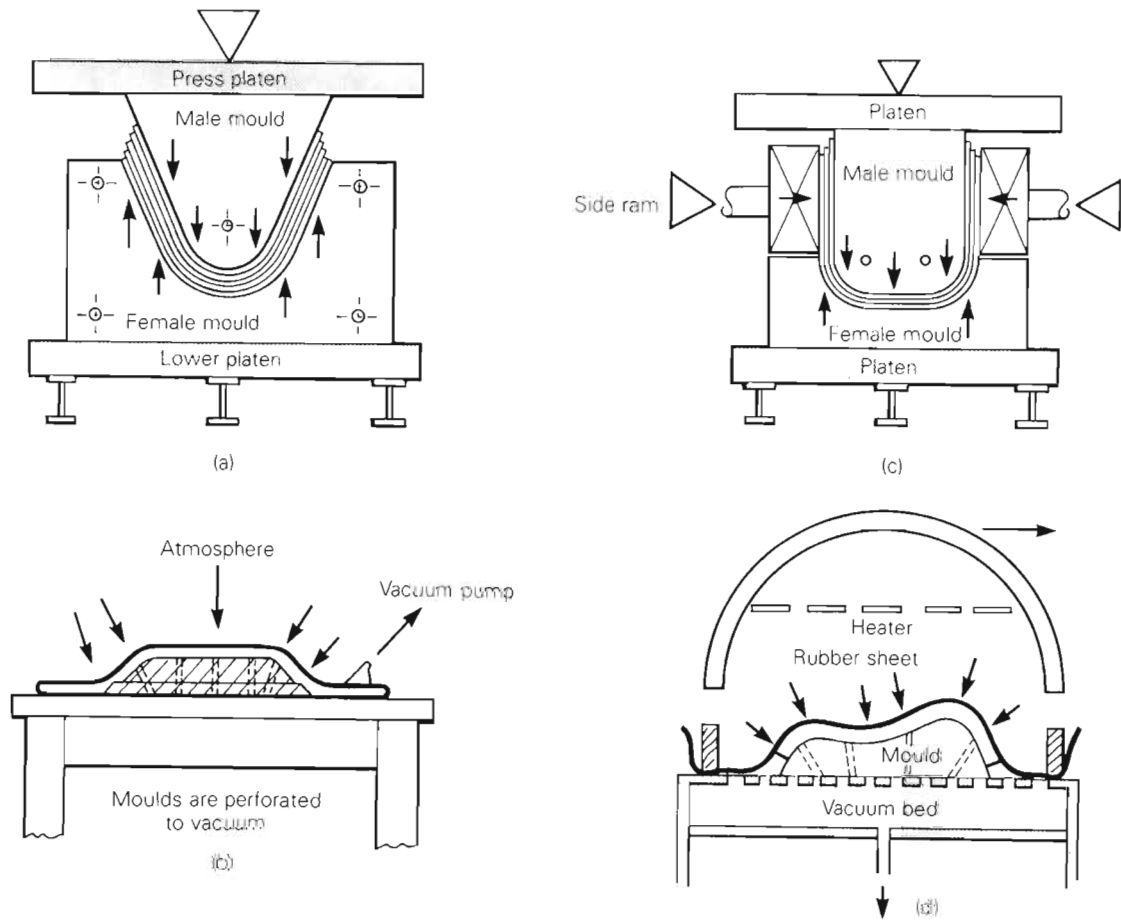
Methods of moulding: (a) matched moulds, (b) shell press, (c) vacuum bag, (d) vacuum press.
